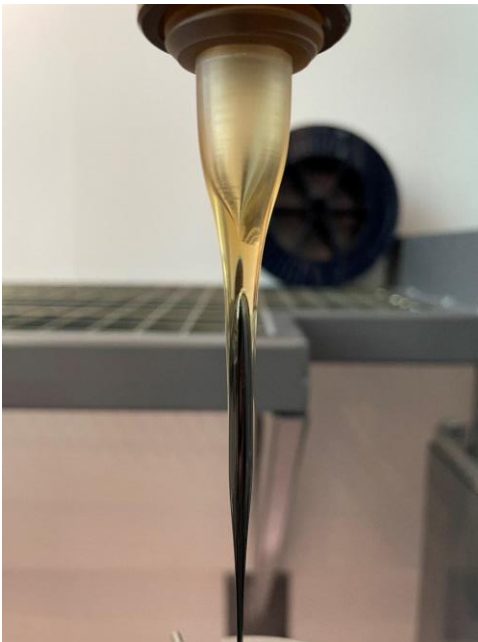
A fibre drawn rod-in-tube preform in the protective polymer.
